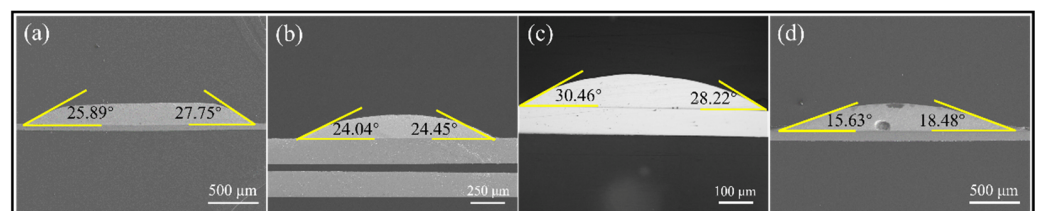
Wetting angle: (a) 13.5Sn-37.5Bi-45In-4Pb quaternary eutectic solder paste; (b) SAC305 solder ball; (c) Sn58Bi solder paste; (d) the fully mixed solder of 13.5Sn-37.5Bi-45In-4Pb quaternary eutectic solder paste and SAC305 solder ball.
